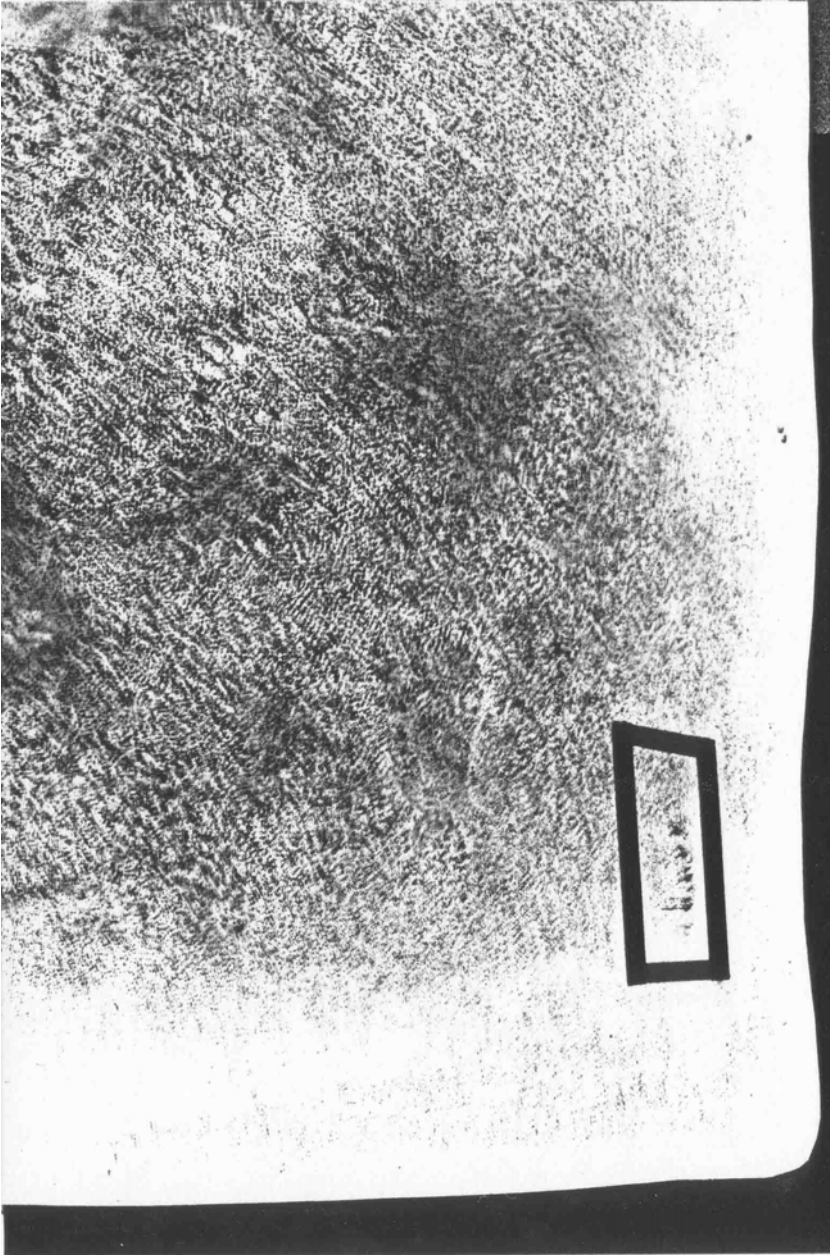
Example of subsurface cracks beneath gutter (outlined in black box on outer radius sulfur print).
